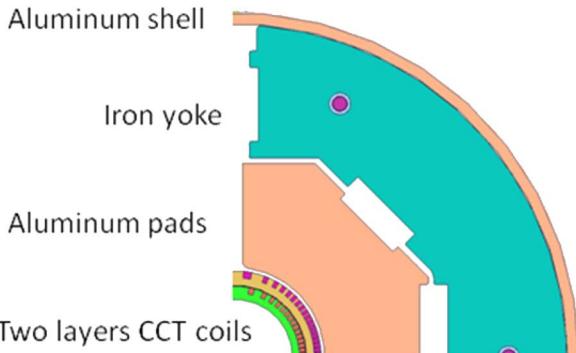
CAD cross section of a two-layer CCT1 showing canted winding.
